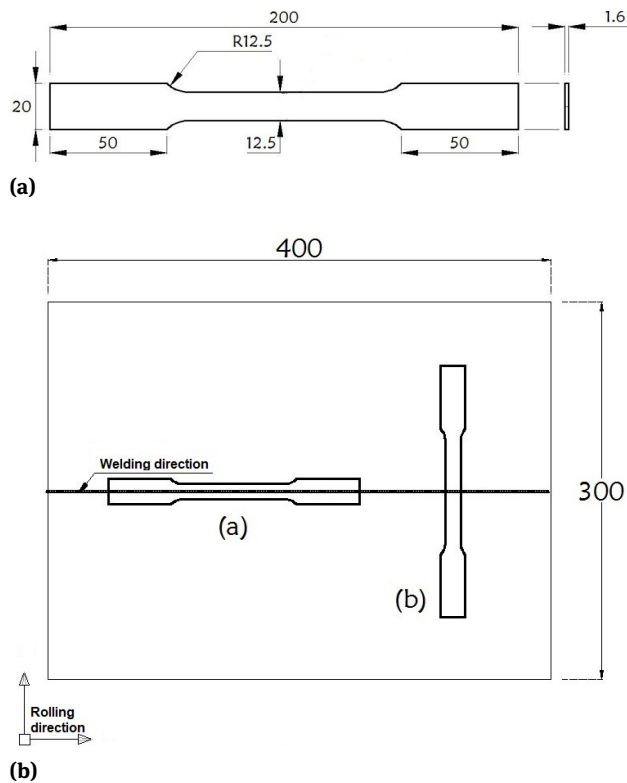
(a) The tensile test specimen geometry; and (b) Configuration for longitudinal and transversal direction of the welding and rolling orientation (all units are in millimetres).
